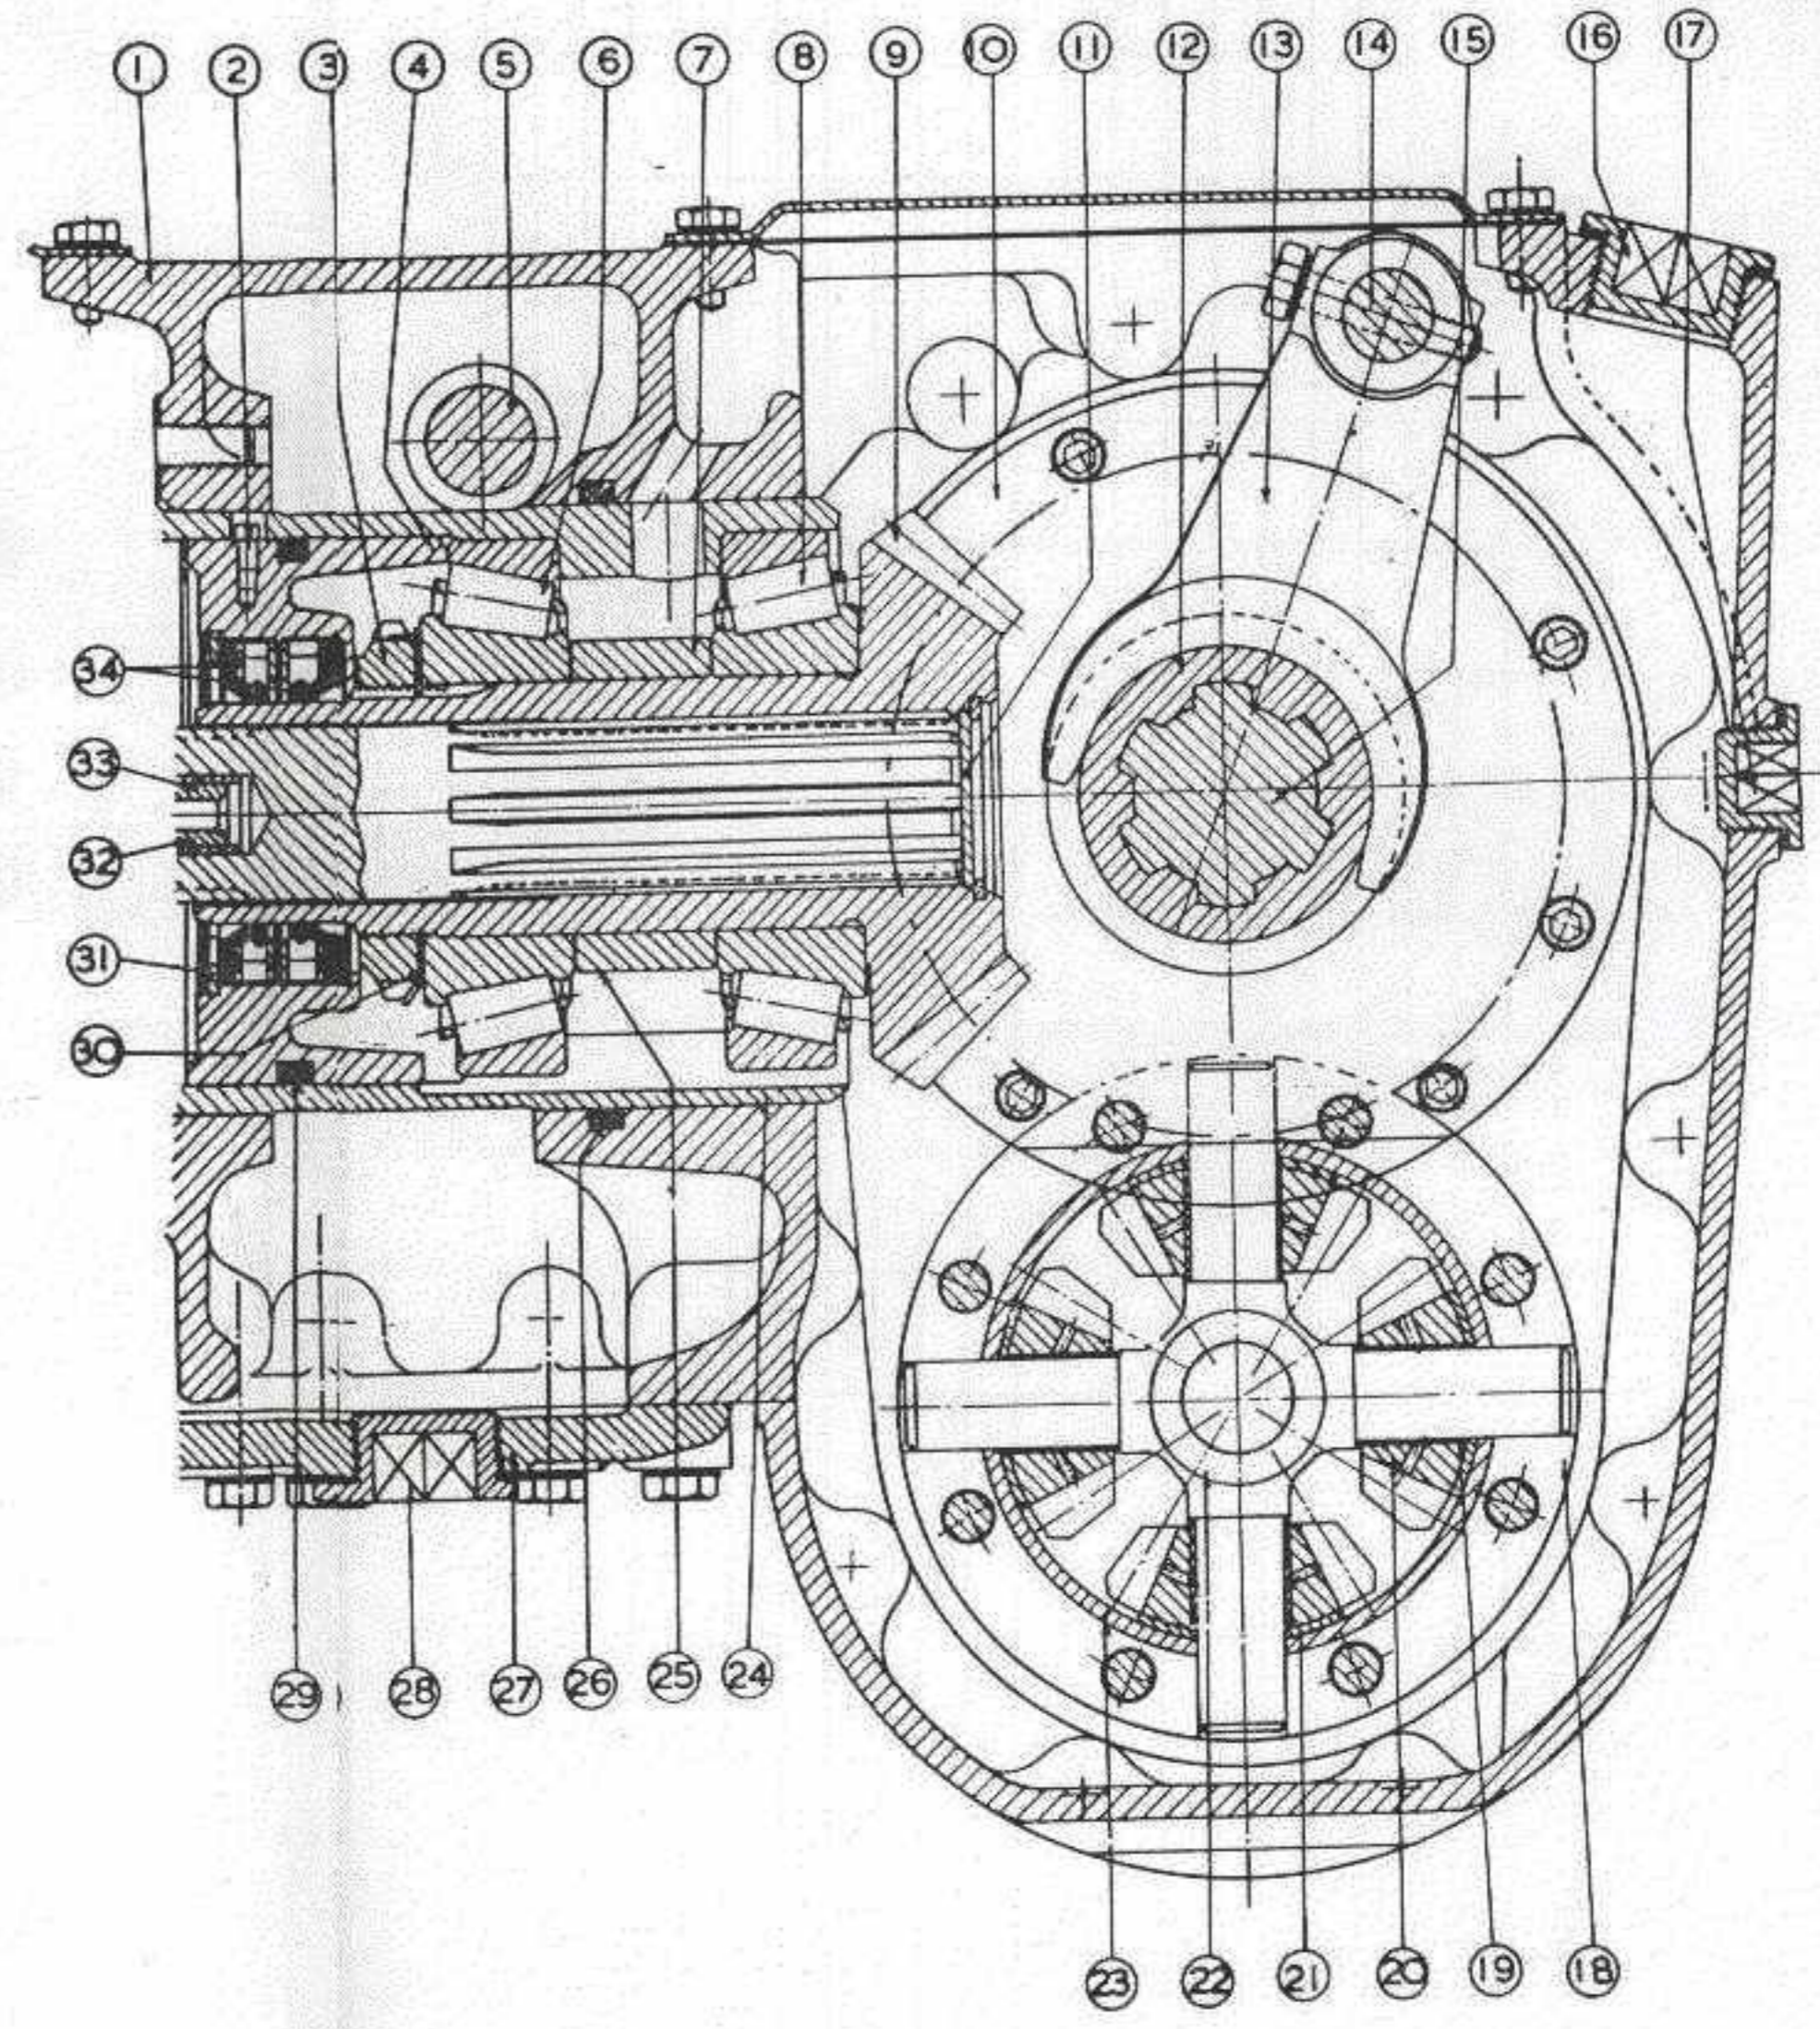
ARRANGEMENT OF INPUT PINION AND TRANSFER BOX
